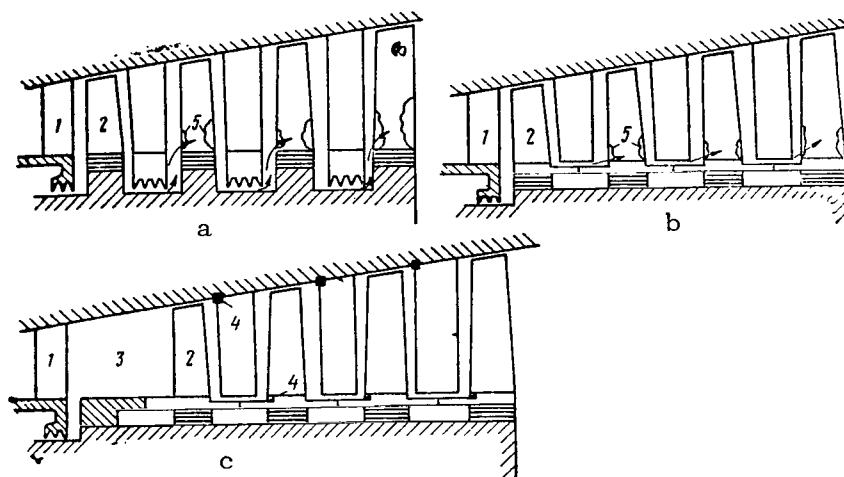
Schematic Drawing of the Flow Section of a Gas Turbine Installation Operating on Powdered Coal Fuel: (a) Original Variant; (b) Improved Variant; (c) Final Variant: (1) Nozzle Blades; (2) Working Blades; (3) Separating Space; (4) Inserts of Titanium Carbide; (5) Zones of Erosional Wear.
